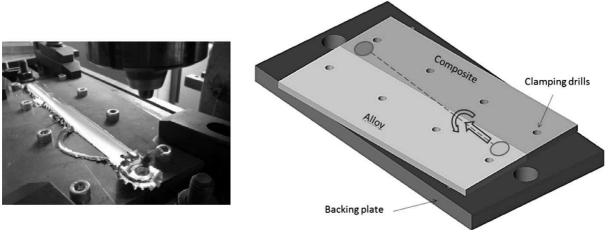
Experimental setup used for the diagonal friction stir weld, (a) photograph of weld D2 and (b) scheme
